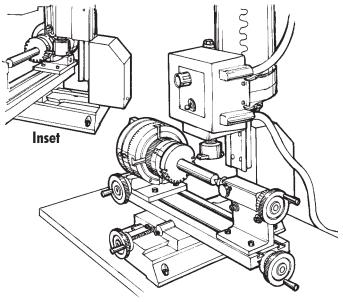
Here is another sample setup for cutting a gear using a chuck. The optional adjustable right-angle tailstock (P/N 3702) steadies the other end of the long shaft. The teeth are cut using a gear tooth cutter holder (P/N 3217). The small inset shows the column moved back to the rear hole to allow clearance for cutting larger diameters.
